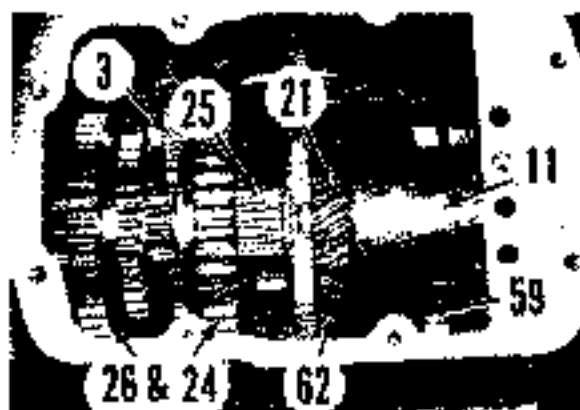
Top view of six-speed transmission assembly with snap rings removed. Refer to Fig. 126 for legend.
